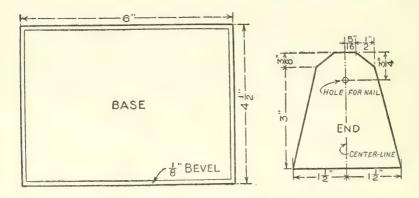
Details for the Spool-Holder Shown in Fig. 34.
